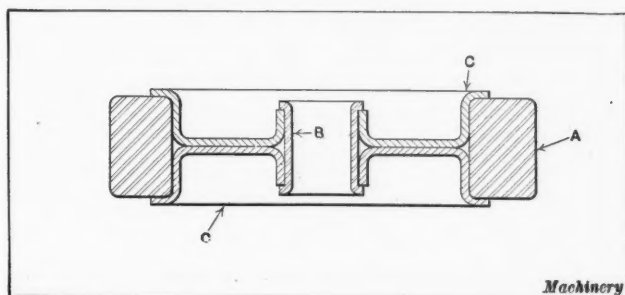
Cross-sectional View of Rubber-cushioned Wheel
